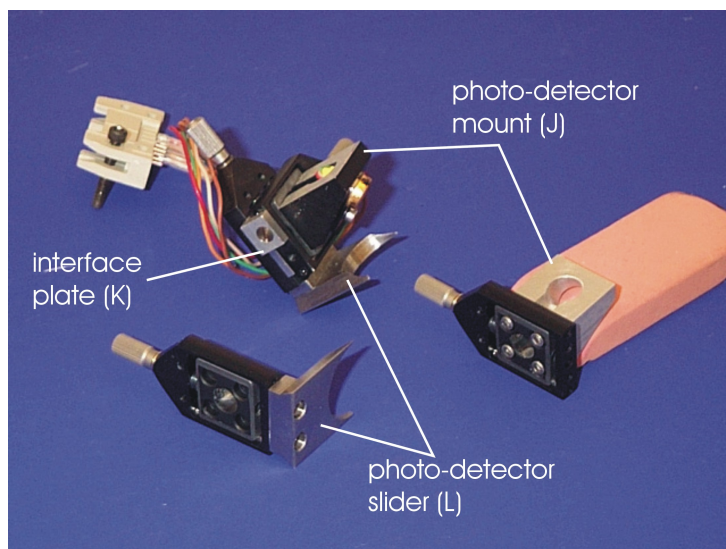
Assembled and partially disassembled holder of the photo-detector. Shown are 2 sets of parts from different setups. Note that the mounting plate of the photo-detector has a groove from the hole for the detector going to the center hole of the translation stage, through which the wires for the detector will run. Note that for the assembled detector the wires run through an additional hole to the side, not through the translation stages.
